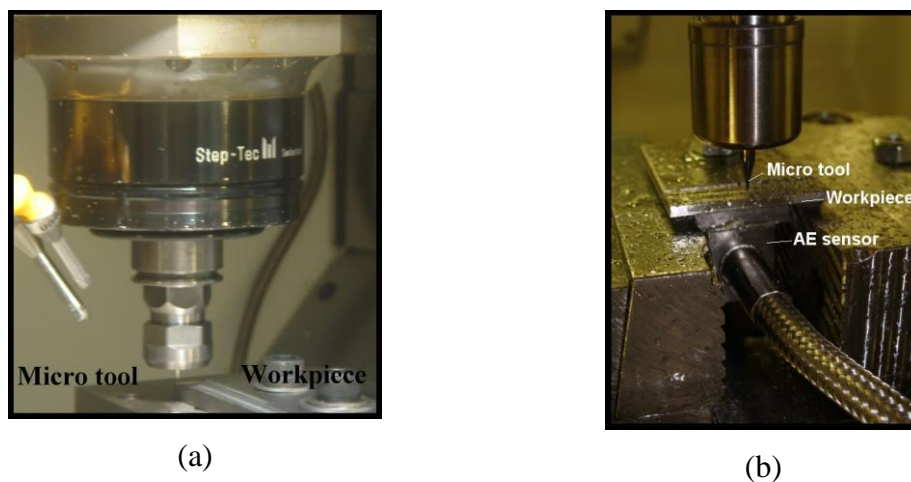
Experimental setup for (a) Ferrous workpieces (b) Inconel 718
